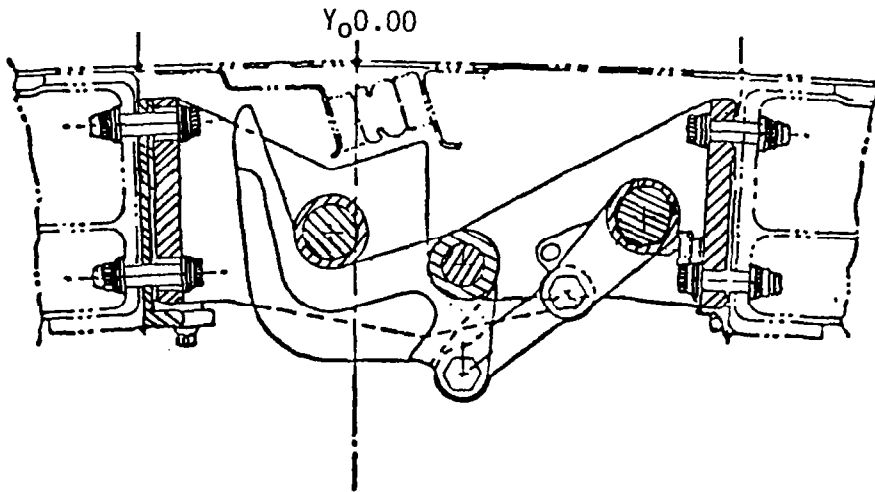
CENTERLINE LATCH ASSEMBLY,
